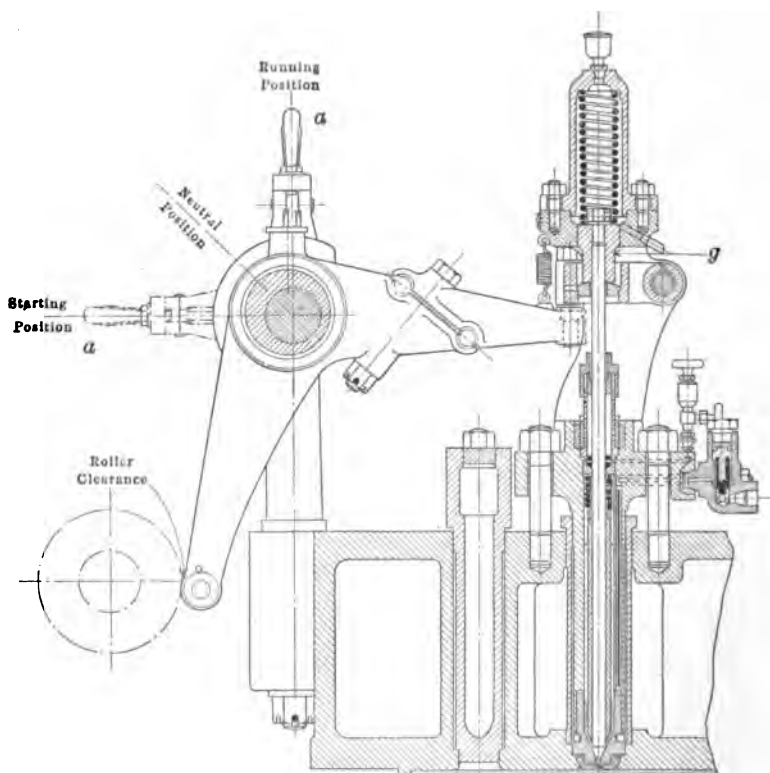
Fuel valve arrangement Busch-Sulzer type B Diesel.
